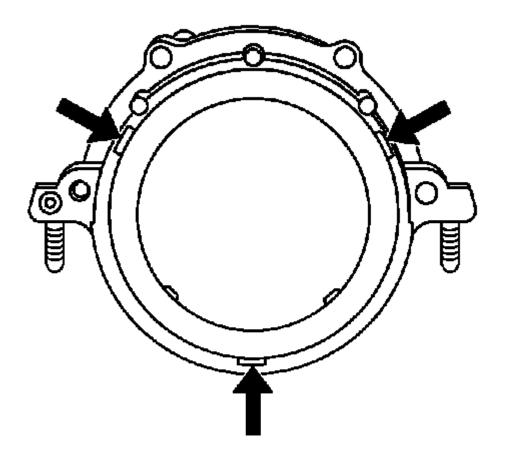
View Of Crankshaft Rear Oil Seal Notches Courtesy of GENERAL MOTORS CORP.
